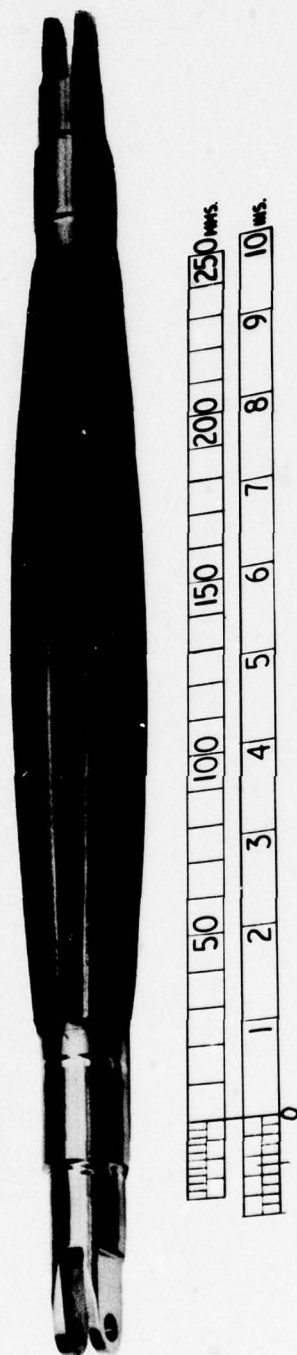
Welded and Superplastically Formed Passenger Cabin Floor Support Strut
